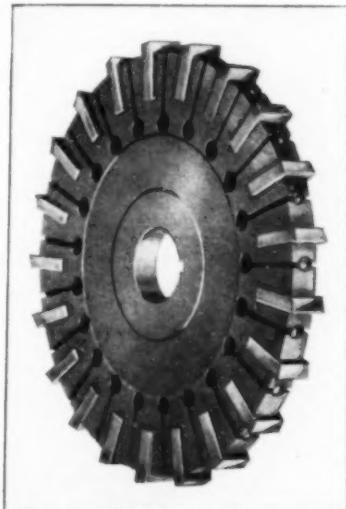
Side and face mill with inserted and adjustable Stellite blades.
